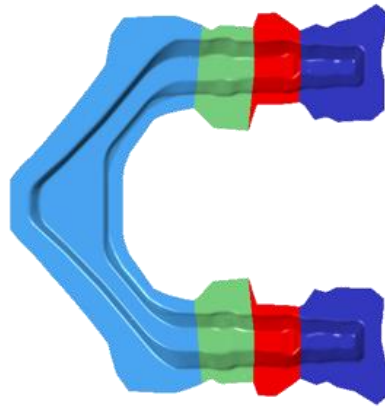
Optimized Draw Bead Forces and optimized blank geometry -Upper Rail
